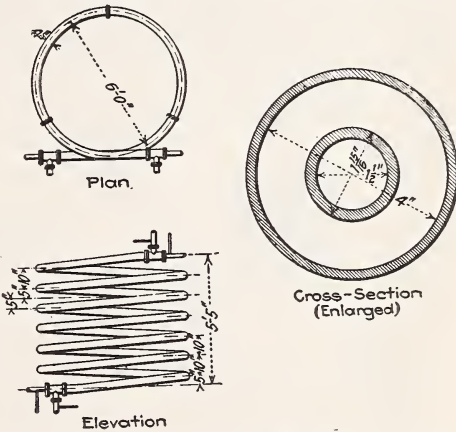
VIEWS AND CROSS-SECTION OF SPIRAL COIL COOLER NO. 3
